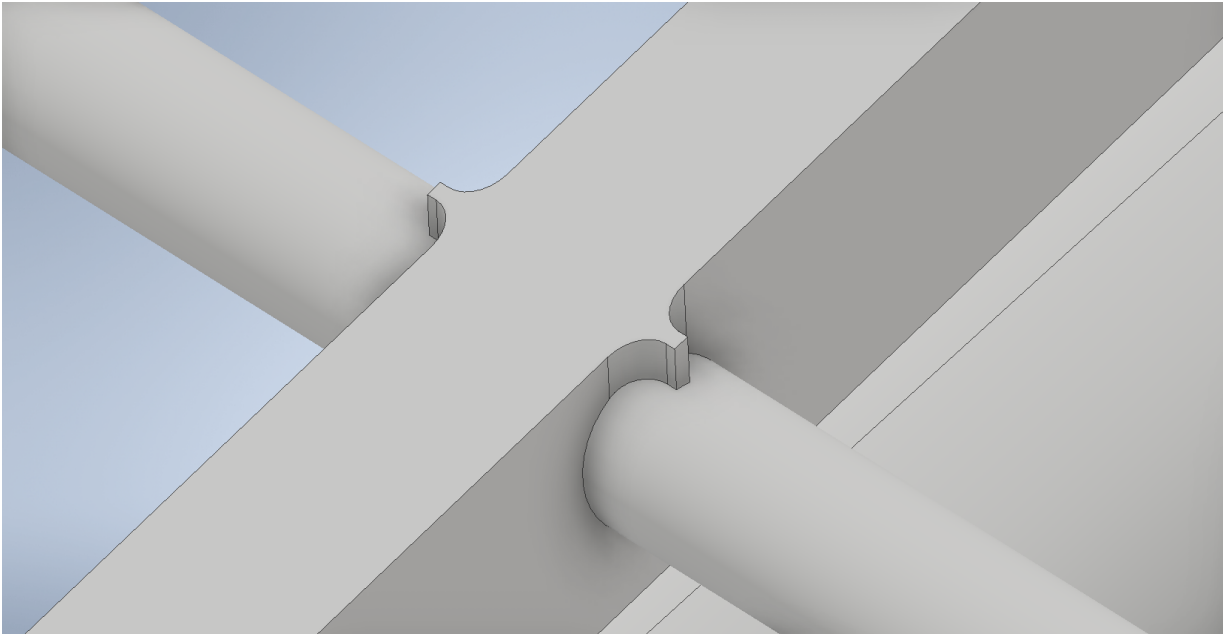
Isometric view of a wireframe section showing protrusions on the connecting bar
